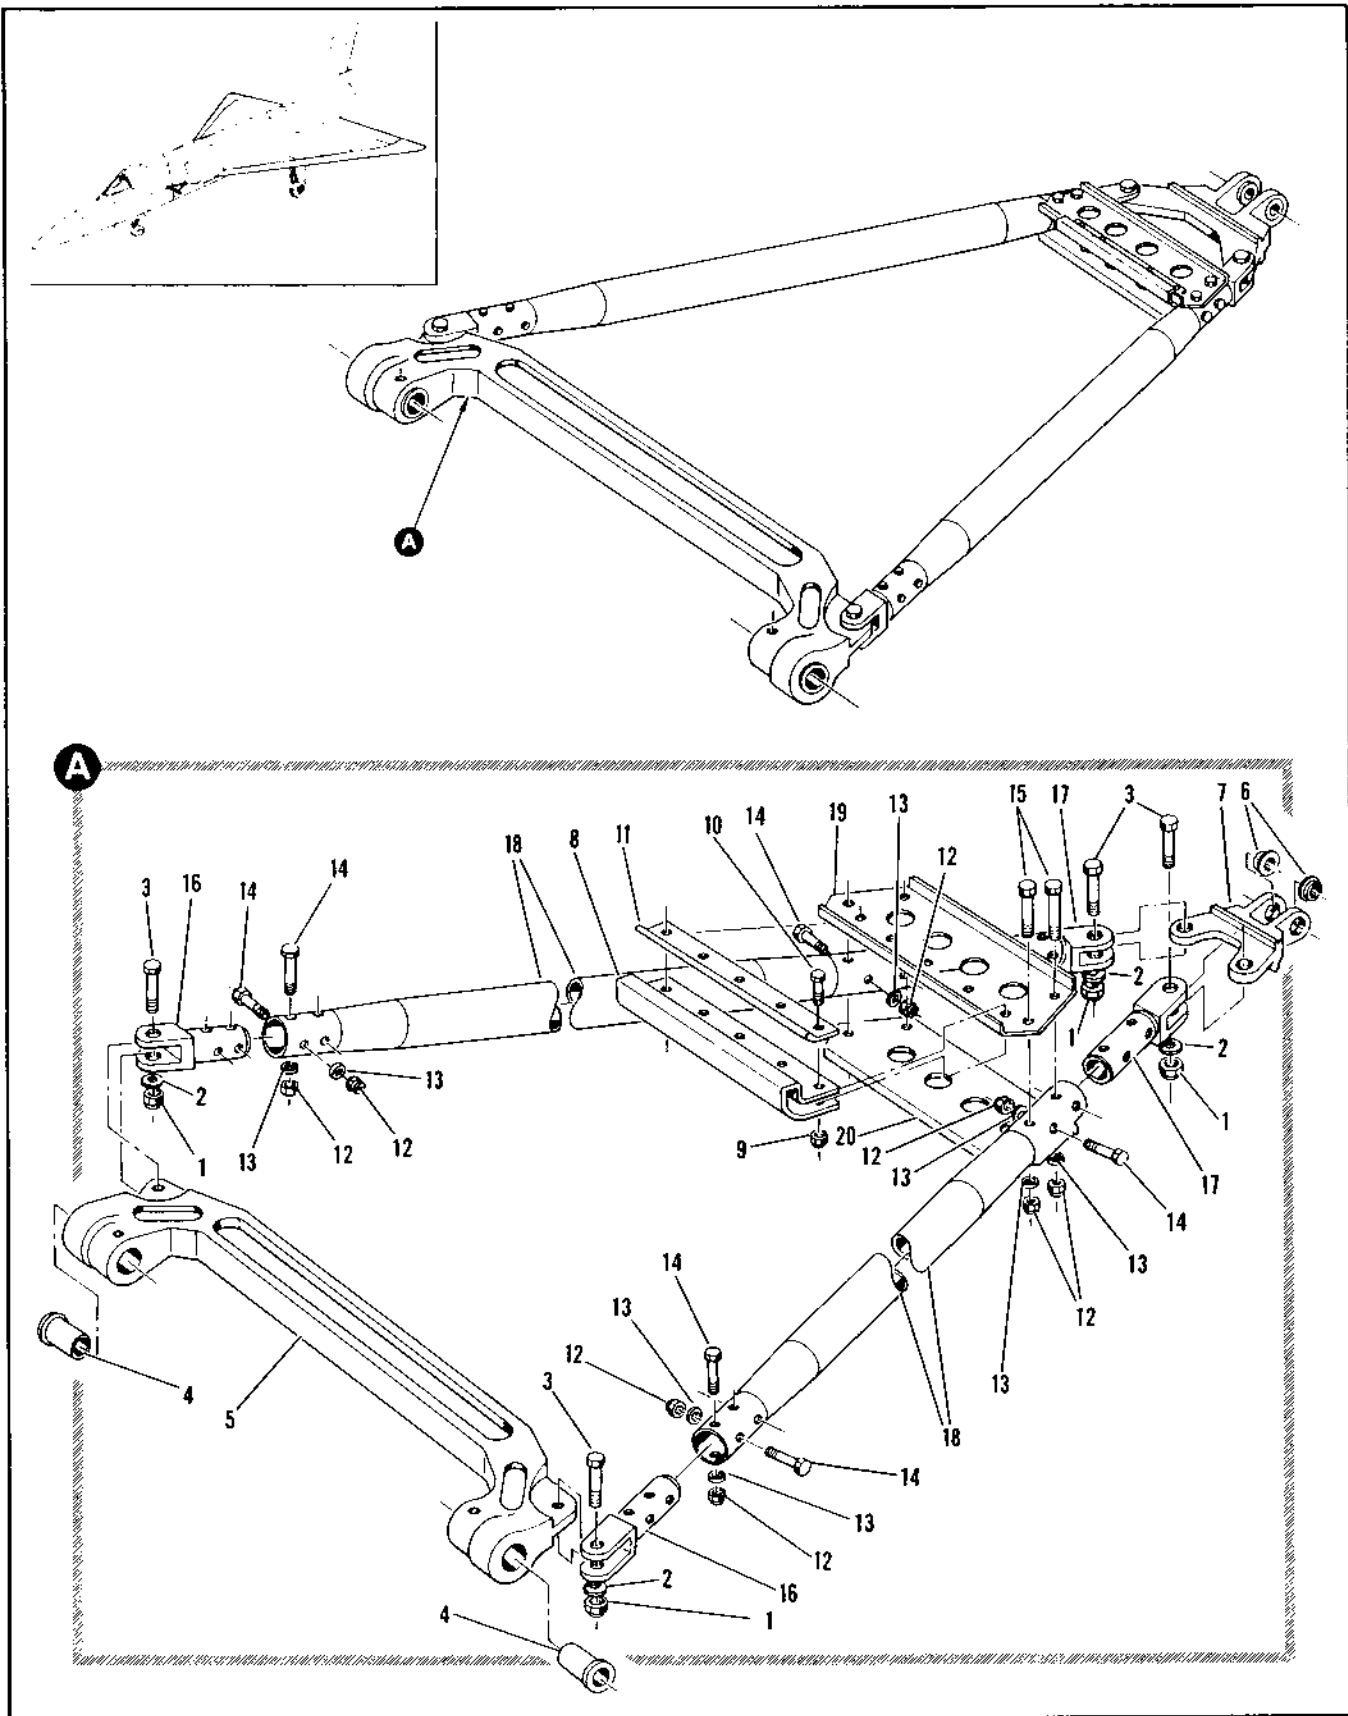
Fwd Displacement Gear Lower Drag Arm Assembly Alternate
